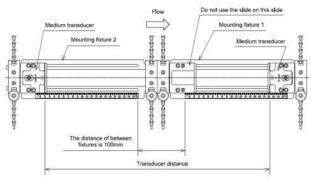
,2,9-15 Combine mounting fixture (over DN200mm)
